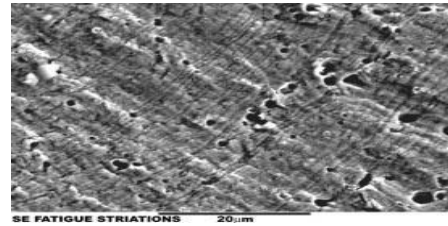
Fatigue striations visible on type 302 stainless steel spring fracture. [3]
